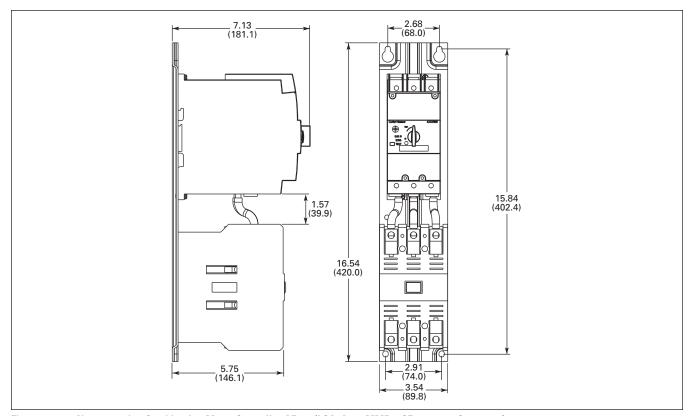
Non-reversing Combination Motor Controller AE319 (LSA, A309 MMP + CE15 90 mm Contactor) — Approximate Dimensions in Inches (mm)
